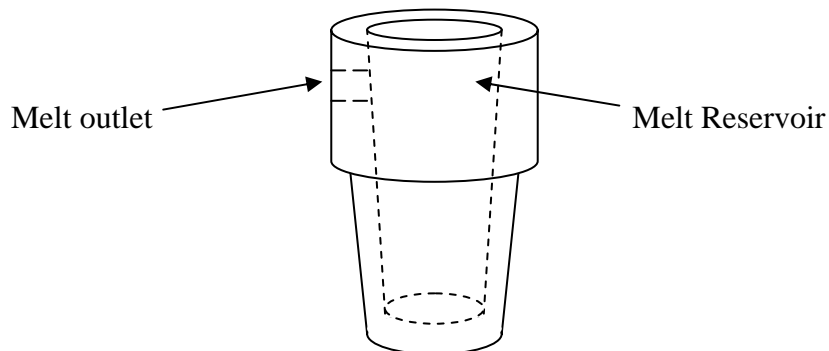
The castable alumina crucibles's view used in centrifugal casting machine.
